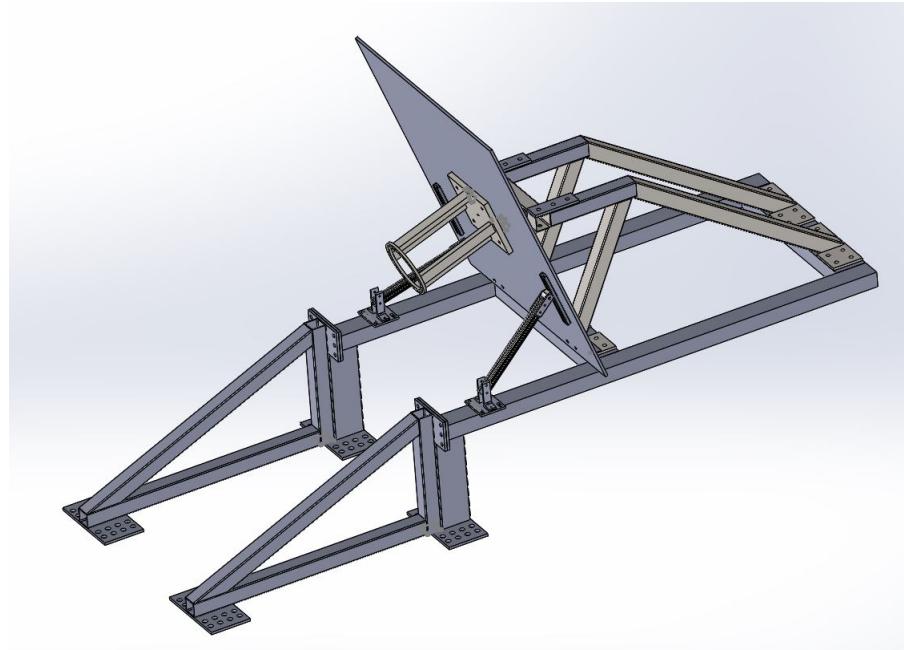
Engine interface mount block, canted at a  $10^\circ$  angle and bolted to the blast plate. A singular bolt is threaded into the truss
